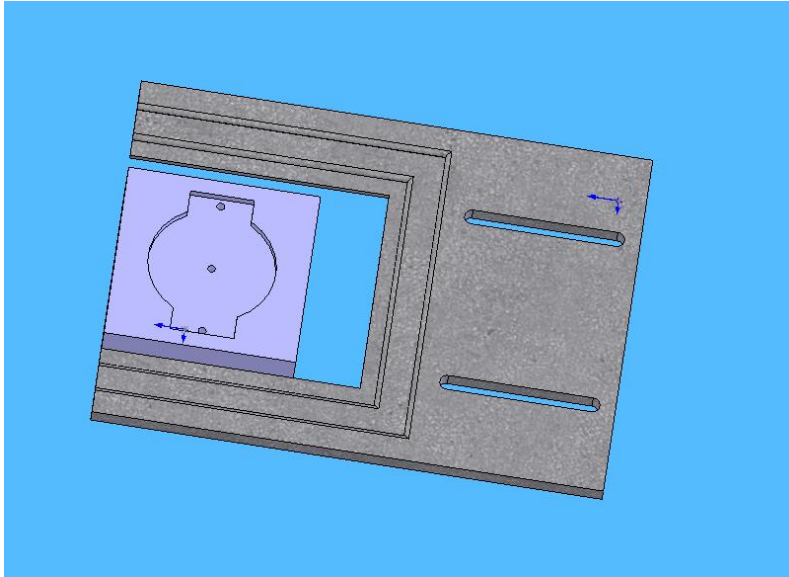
Initial Design of Fork Loading Stage for Quick Alignment and Wafer Replacement.
